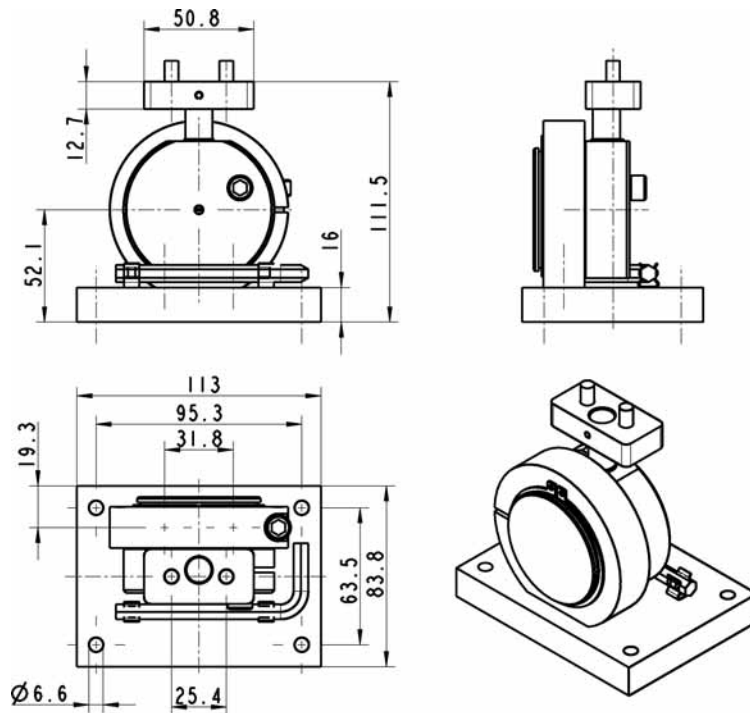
Adjustable mounting base (XXXTMP50ACMB) fits with XXXTMP50ACMP only
